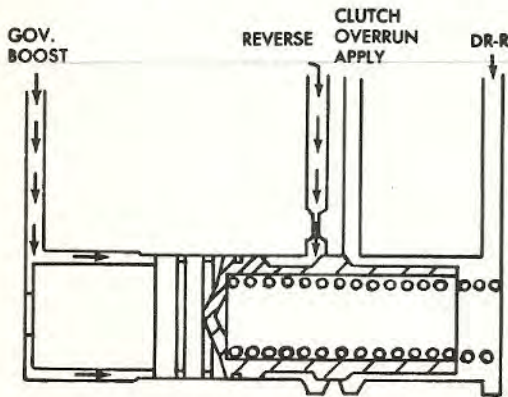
Overrun Clutch Valve - Below 5 MPH
